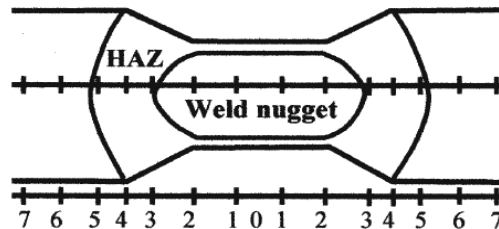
Welded samples' plain appearance with hardness test points
